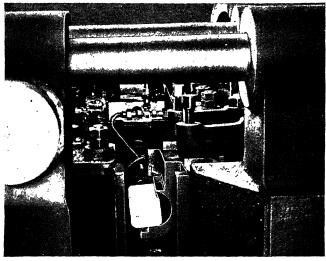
First step in forging a billet. The red-hot billet has been placed in the holding die, which is just closing. (Baldwin-Southwark.)
